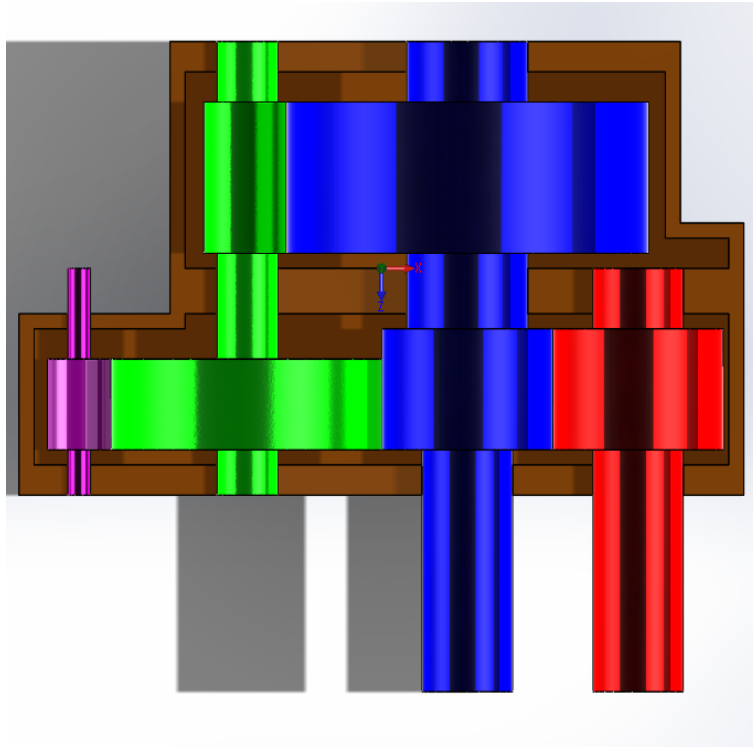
Top view of the selected geartrain layout with the cutaway housing
